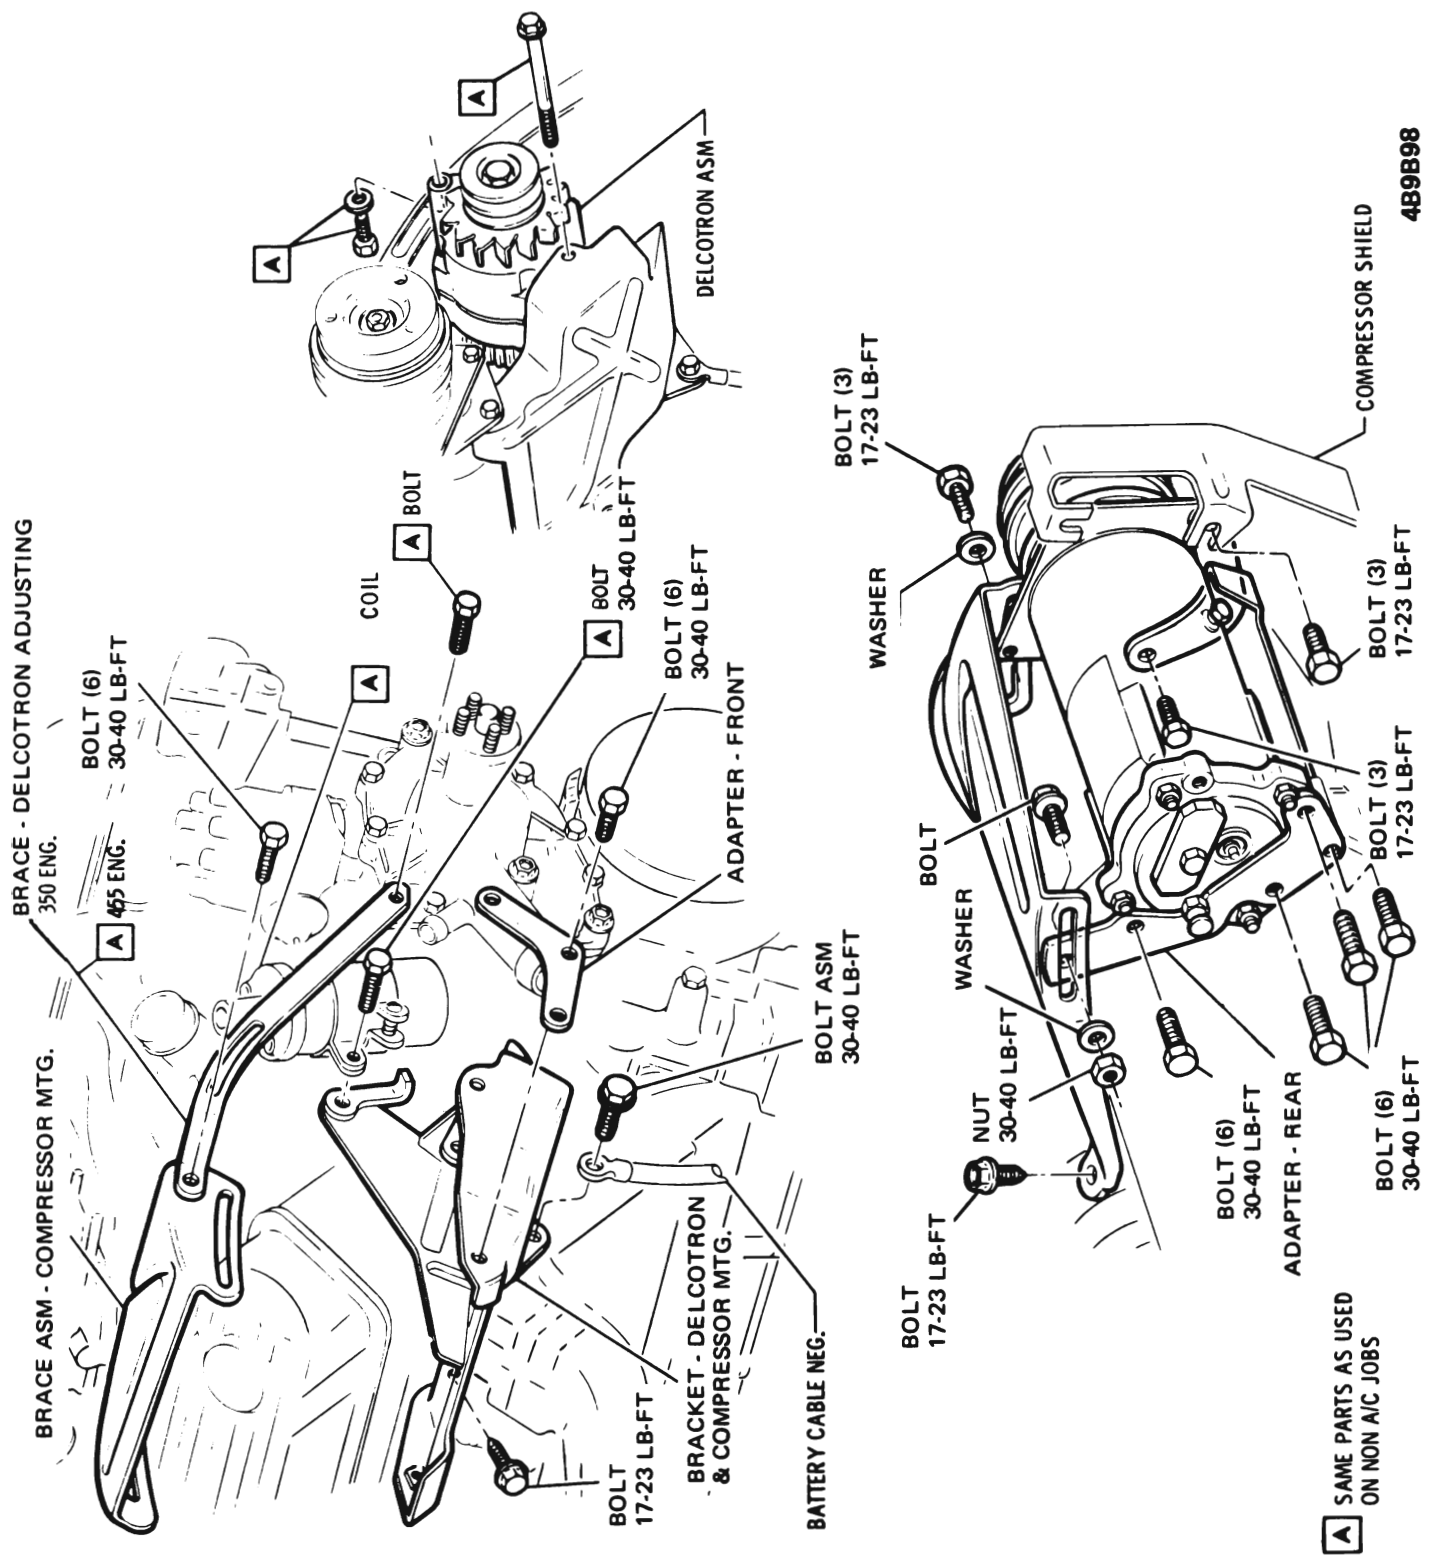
B-117 A/C Compressor and Mounting - A-B-C-E Series
